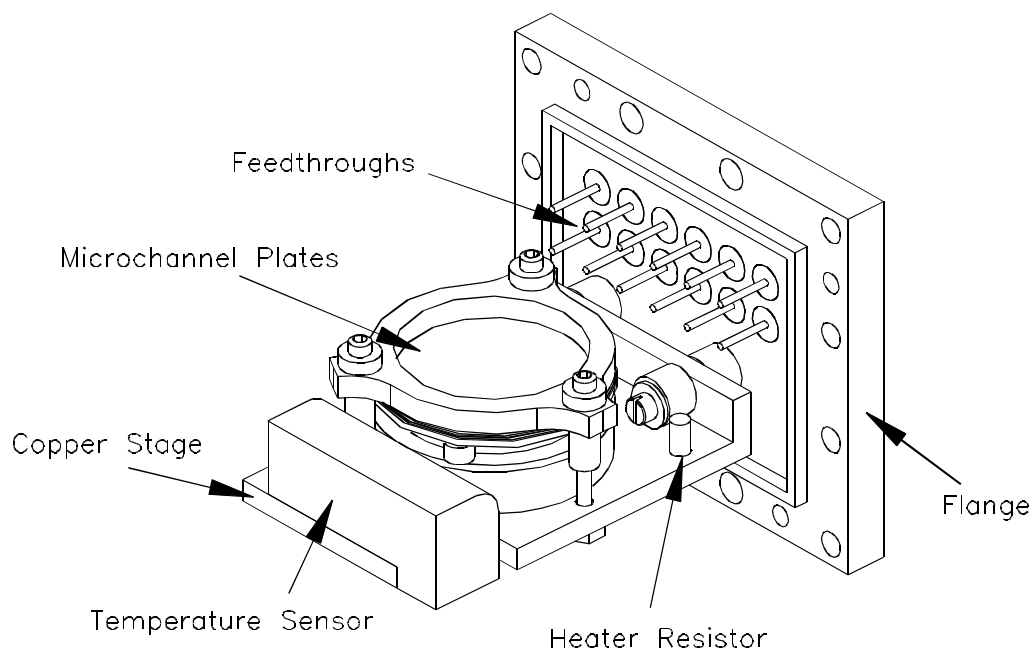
The microchannel plate assembly shown mounted to its flange.
